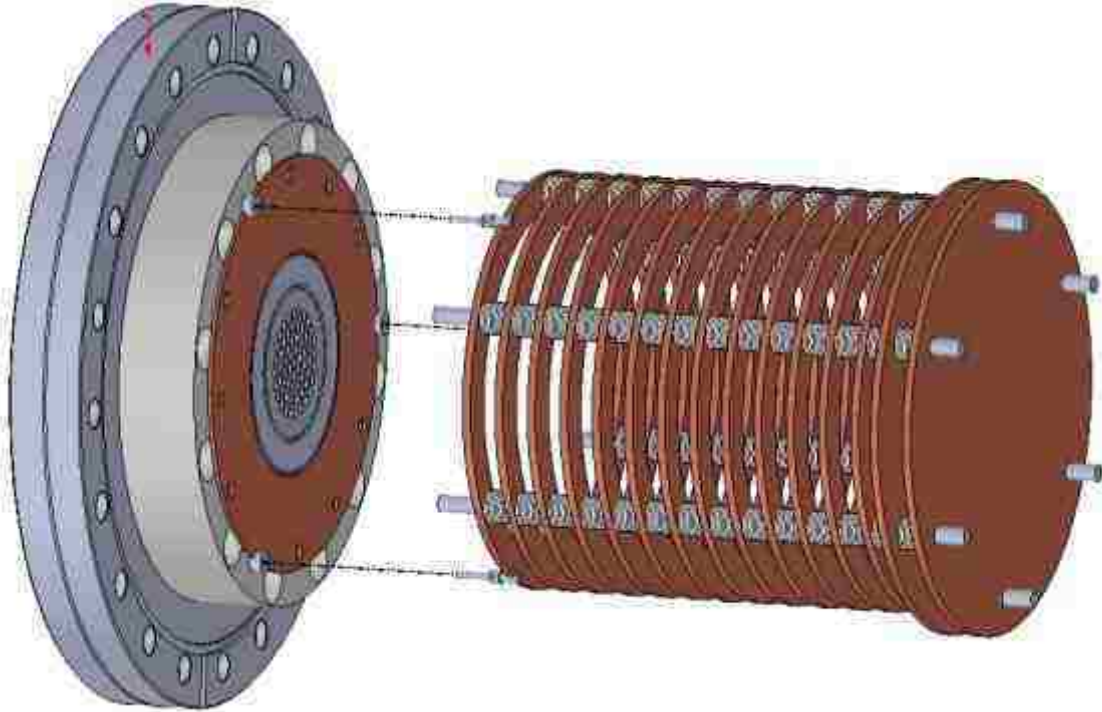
Exploded solid CAD model of the two IC sub-assemblies; the cathode-window sub-assembly (left) and the anode-guard ring sub-assembly (right).
